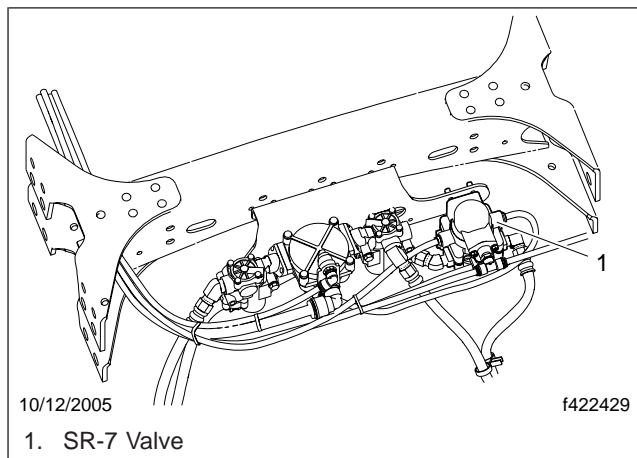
, SR-7 Spring Brake Modulating Valve Installation (typical)
